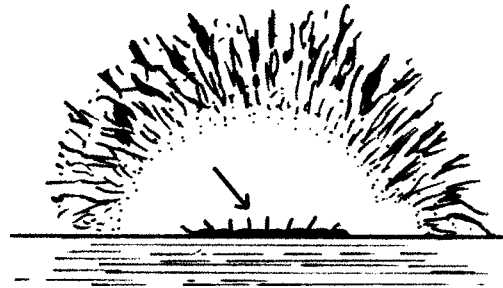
Schematic Drawing of Machining Crack (Arrow) at Fracture Origin(C 1322 and Ref. 1)
